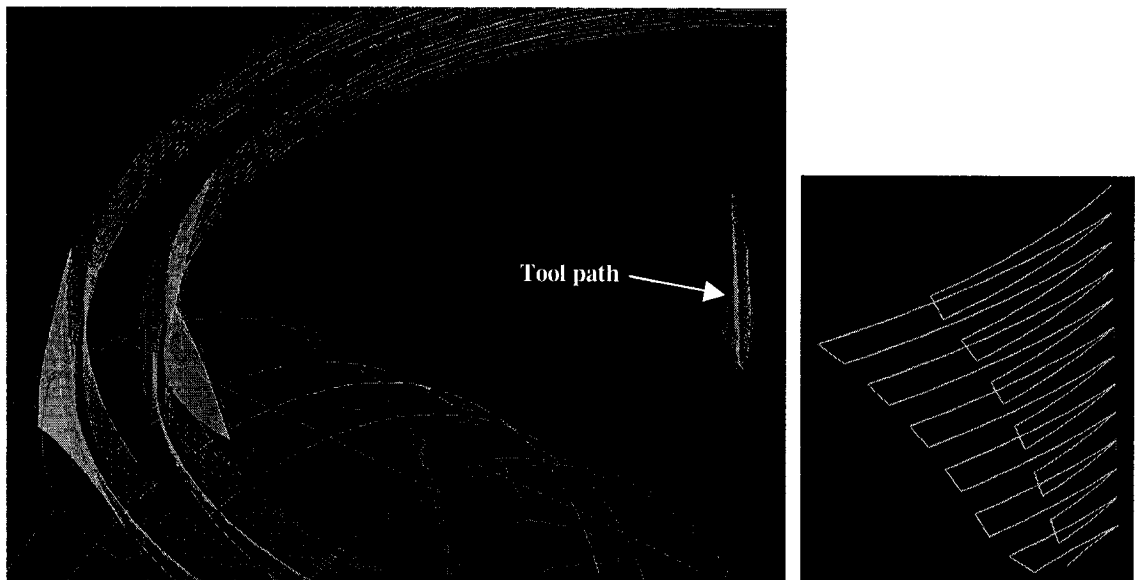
The output of the developed program – the tool path of roughing one slot of the IBR part with the cup mill cutter (left) and a closer view of tool path (right)
